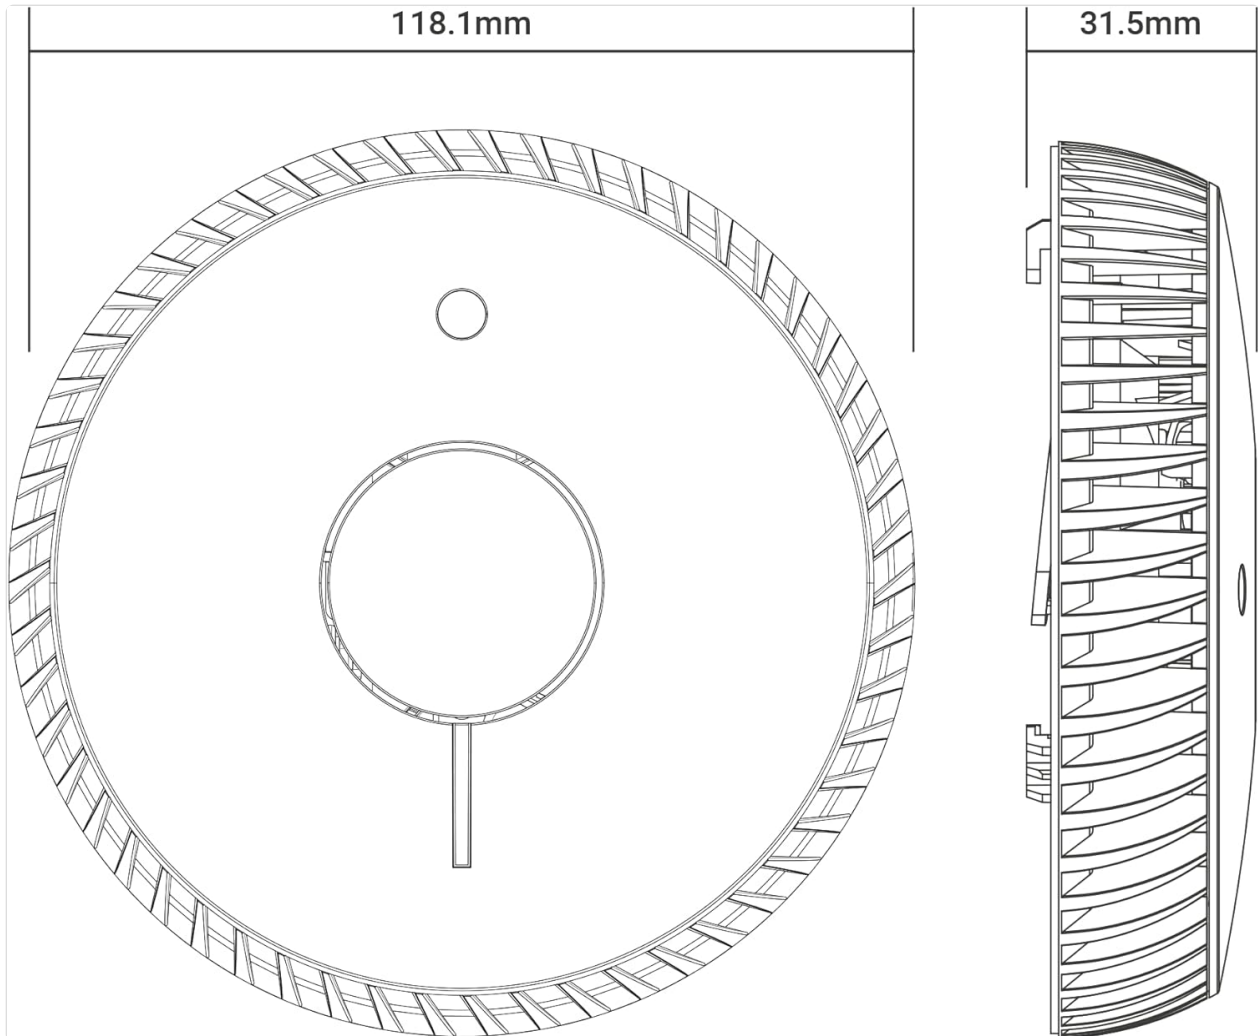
Technical drawing showing the dimensions of the FireAngel FA6115-FRT detector.
